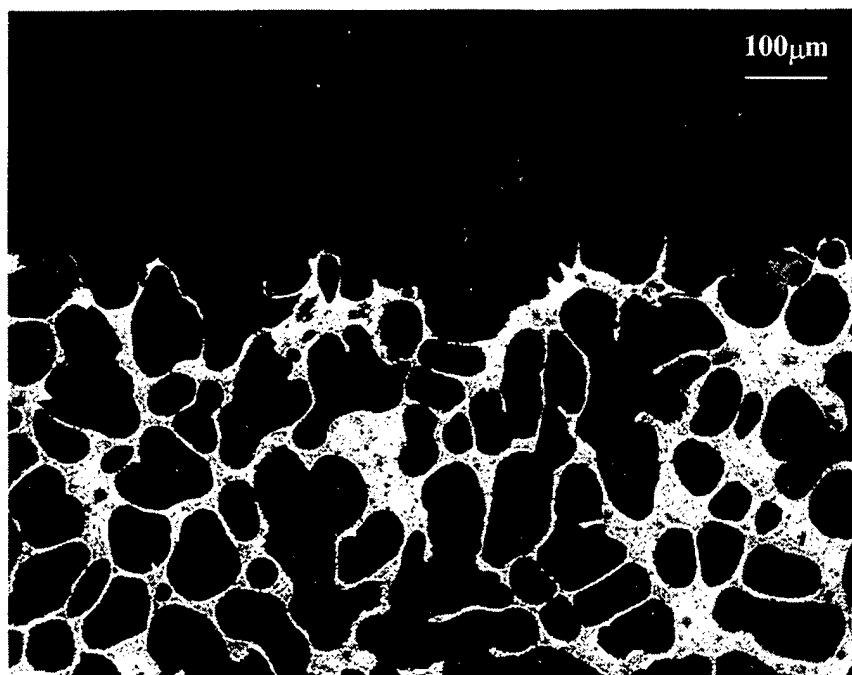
Optical Micrograph of a Section Through the Fracture Surface Showing the Fracture Path and Microstructure for a Cast Be-Al Alloy Specimen Tensile Tested at 121°C (250°F)
